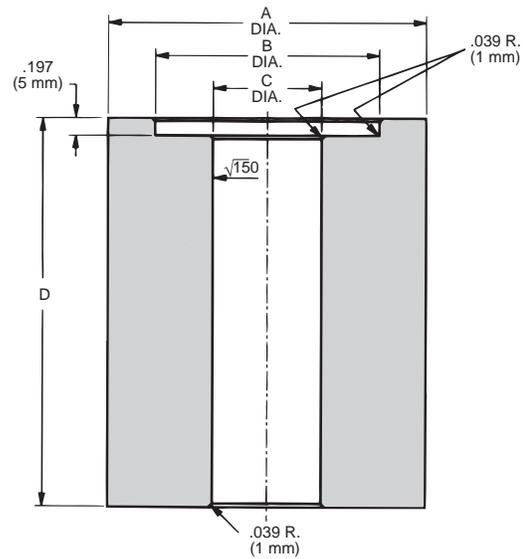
SHAFT SEAL INSTALLATION TOOL
